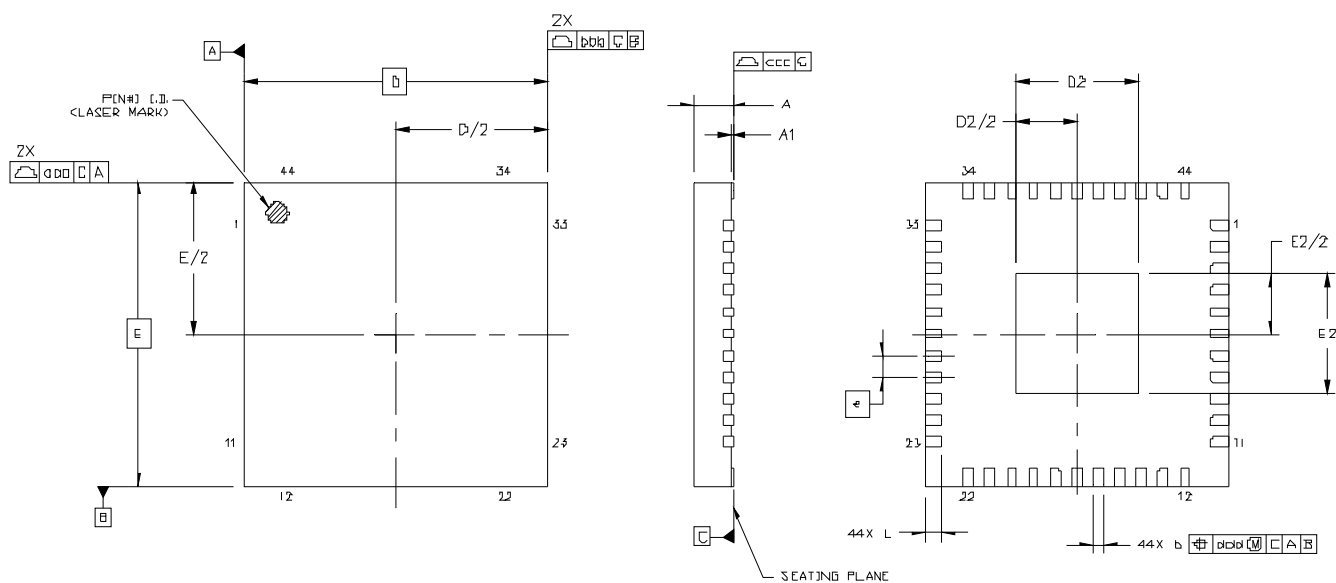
Si53312 7x7 mm 44-QFN Package Diagram
